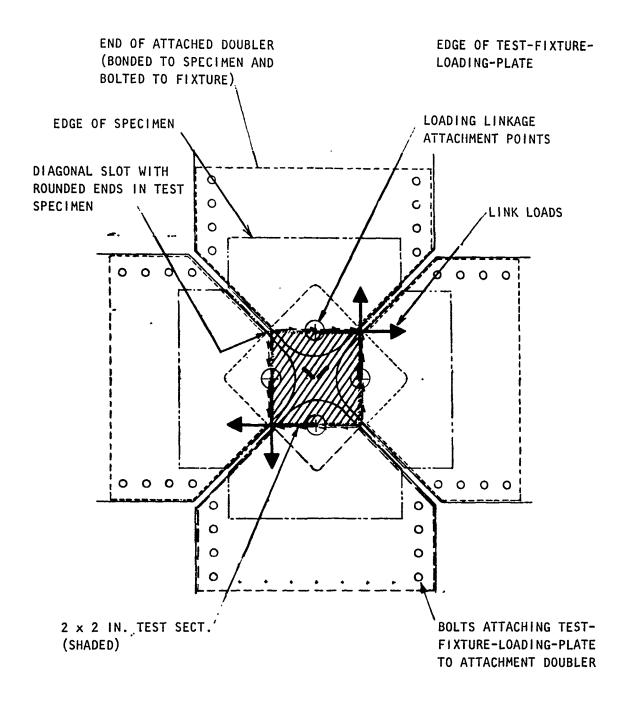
Pure In-Plane Shear Loading Test Fixture Sketch
